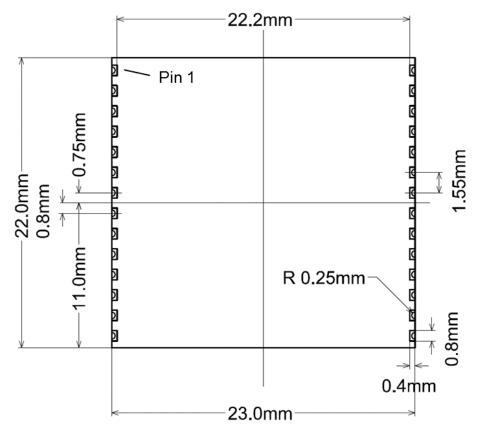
Pad dimensions of swarm bee LE V3 module
